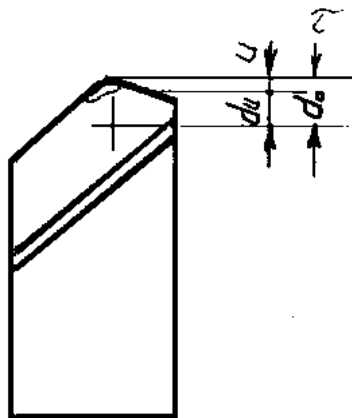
Scheme of measuring the dimensional erosion of the cutter
